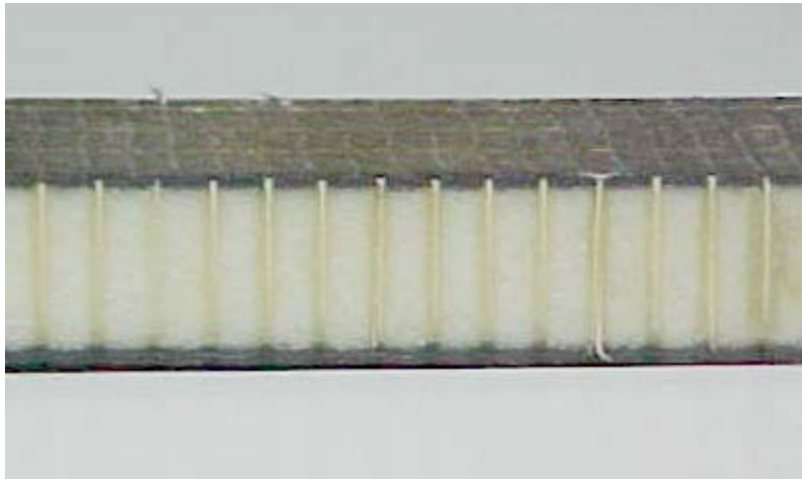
Cross sectional view of stitching, resin flow from top face sheet to bottom face sheet along the stitching
